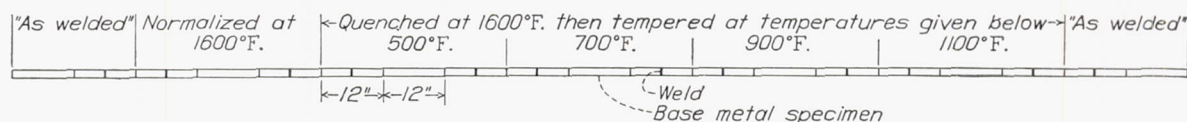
Layout of the tubular butt joints and base metal specimens.
